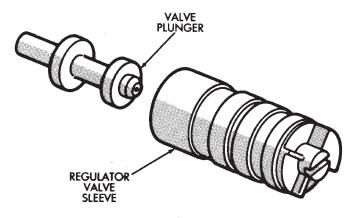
Removing/Installing Primary Pressure Regulator Valve
